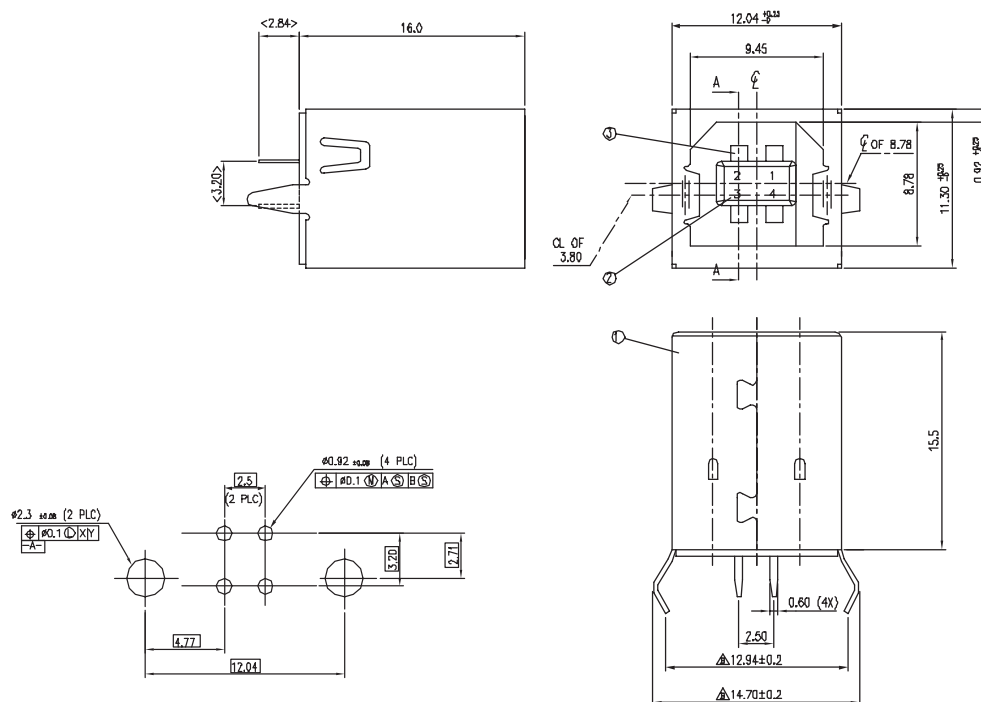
FIGURE A: PCB FOOTPRINT FOR RECEPTACLE (THROUGH-HOLE)
